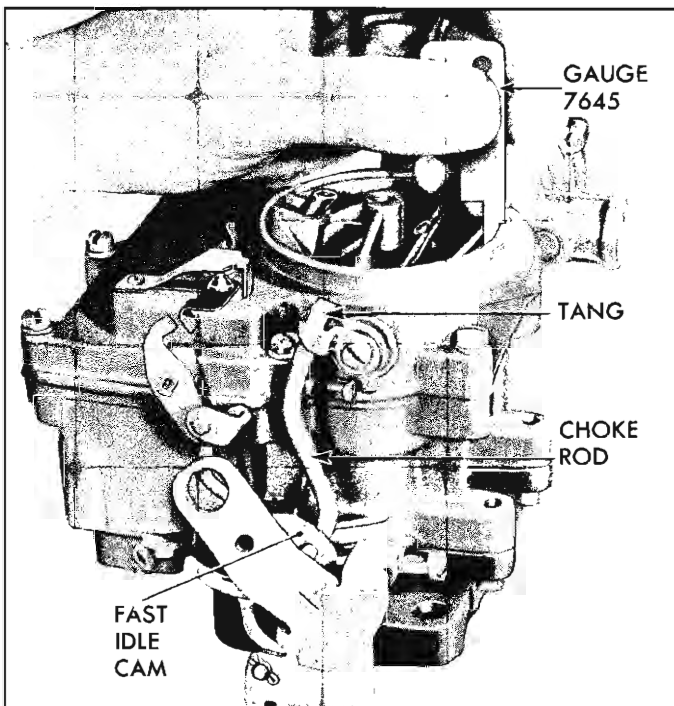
Checking Relationship of Fast Idle Cam and Choke
